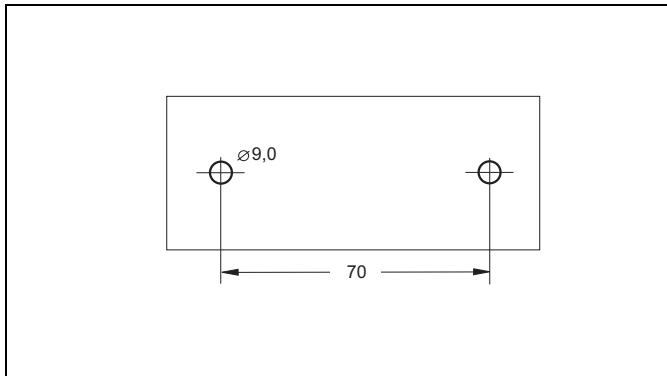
Hole pattern for the stand for the U 4810 circulating pump
